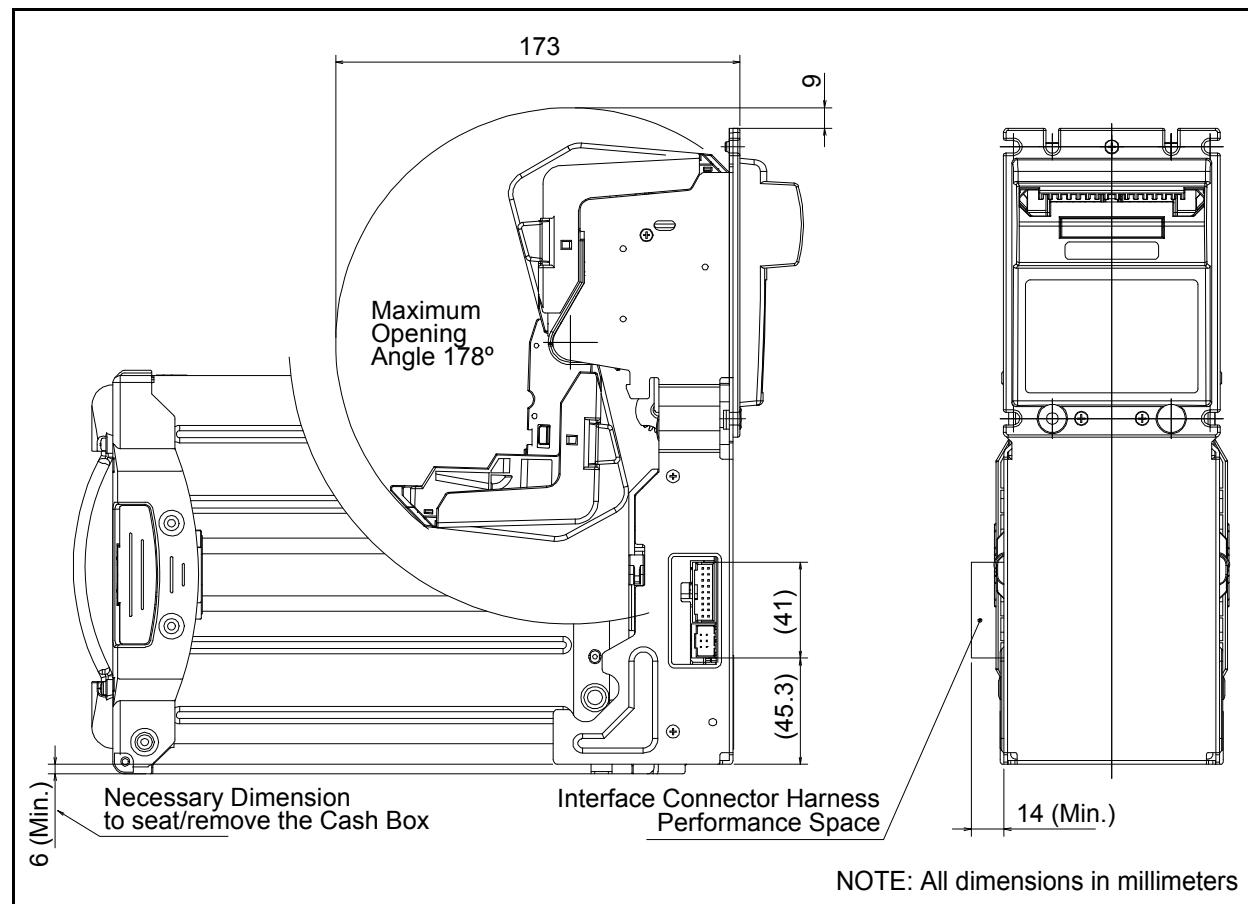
DBV-500 Installation and Maintenance Space Requirement
